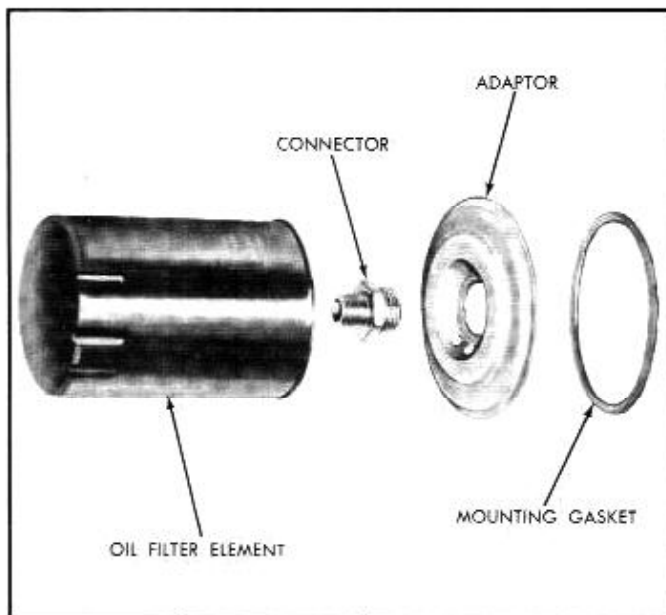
C-20—Disassembled View of Disposable-Type Oil Filter Assembly
